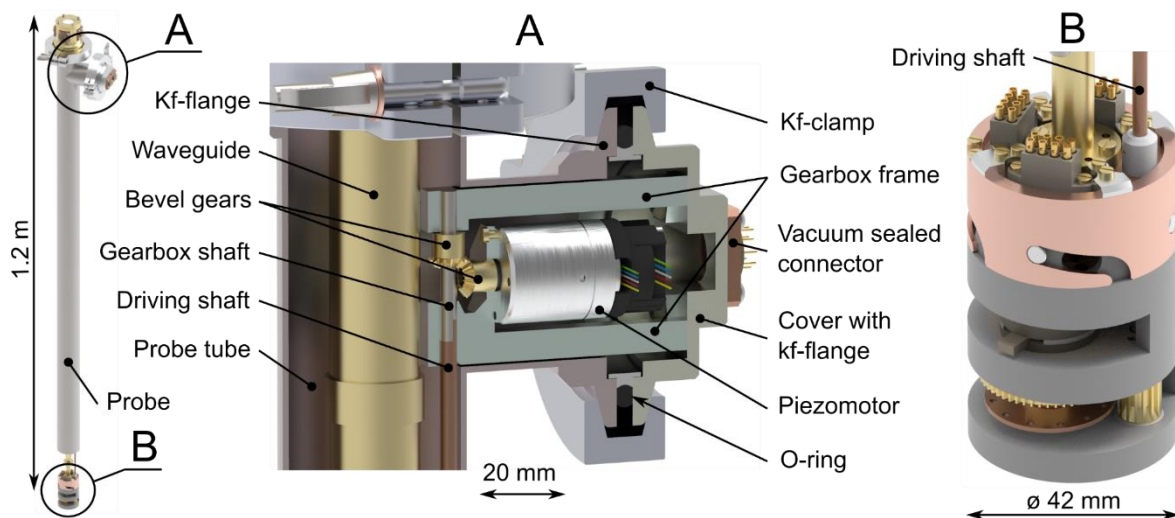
Design of the probe for carousel sample holder: A – gearbox – sectional view with all parts, B – carousel sample holder mount.
